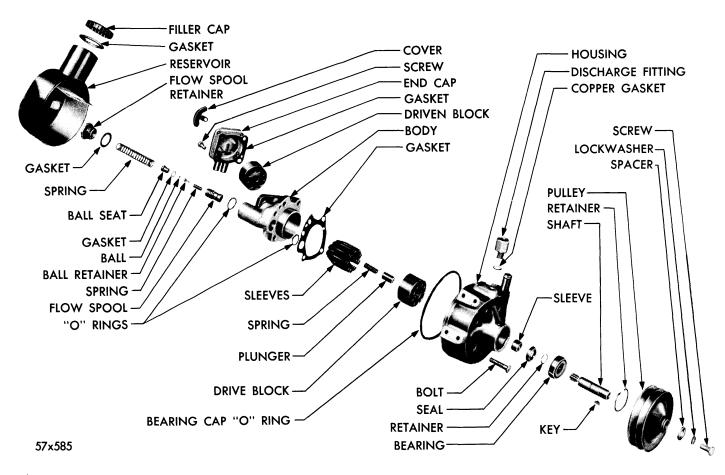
Power Steering Oil Pump (Disassembled View) (Sleeve Type)
